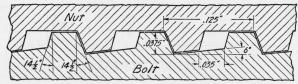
Section of the Dardelet thread for a bolt having a diameter of ¾ inch.
